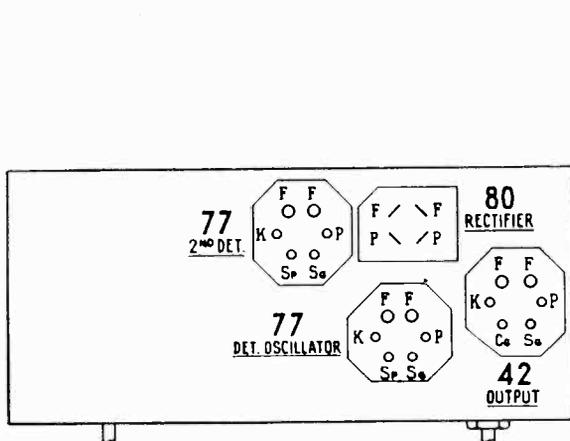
Tube Socket Layout (Viewed from Bottom)
